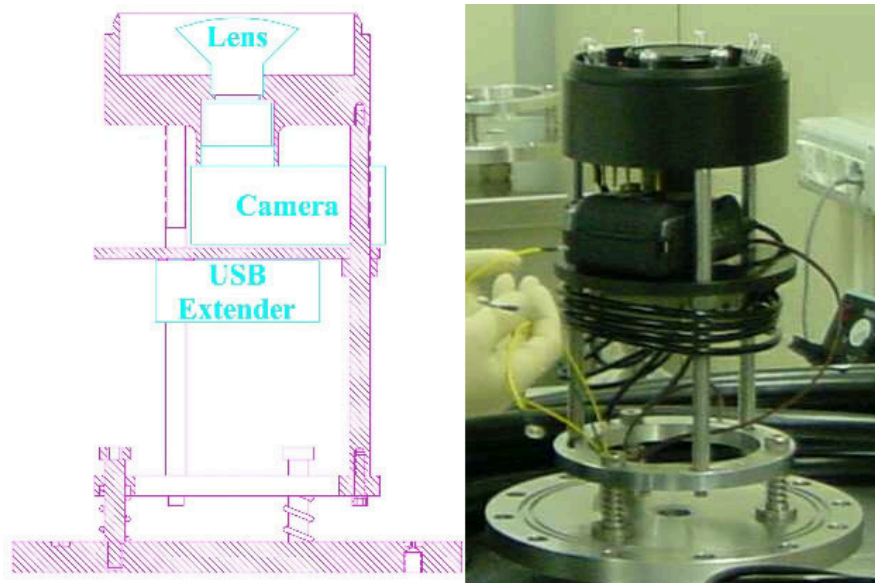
Camera assembly. The camera assembly contains the camera, additional fish-eye lens, lights, LEDs, USB extender, and is all installed into a housing on the SSS on the displayed mounting structure.
